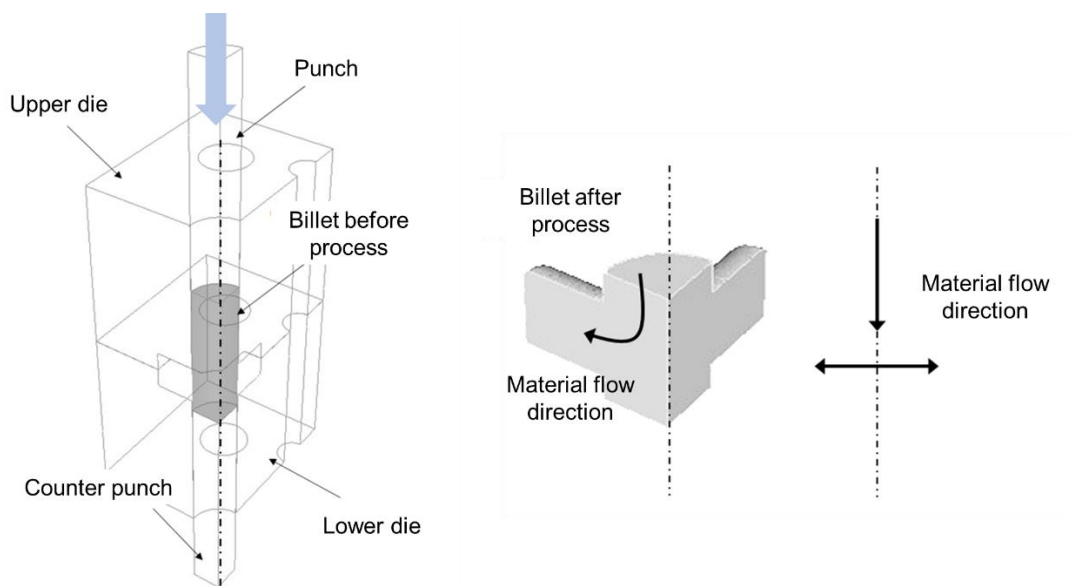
Schematic drawing of the radial extrusion process of a crosshead
